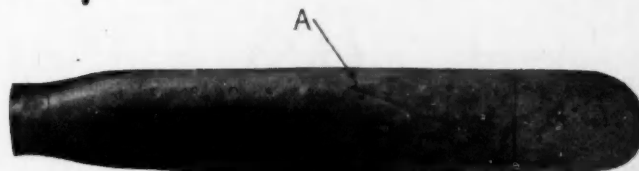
BLADE OF SIMILAR PROPELLER CRACKED AT A
